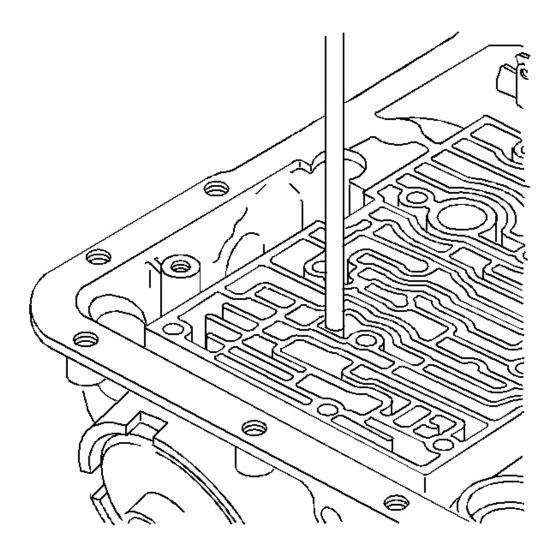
Identifying Third Accumulator Retainer & Ball Assembly Courtesy of GENERAL MOTORS CORP.
